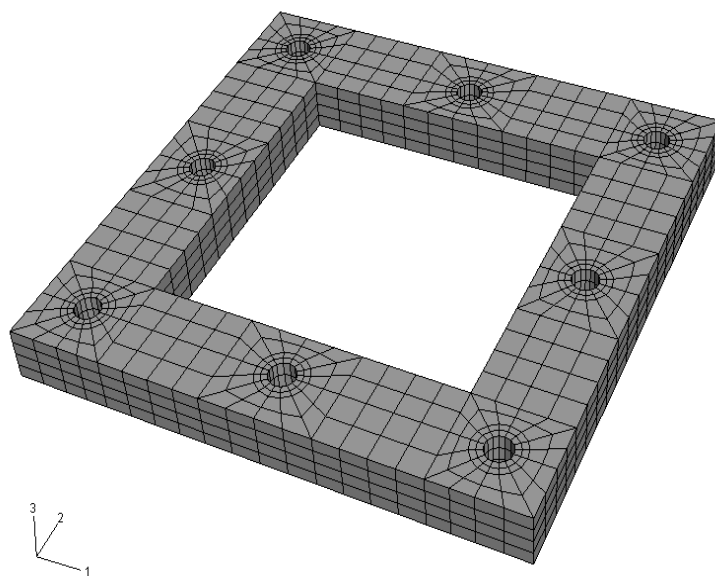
Plate specimen fixture; spacer plate component finite element mesh.
